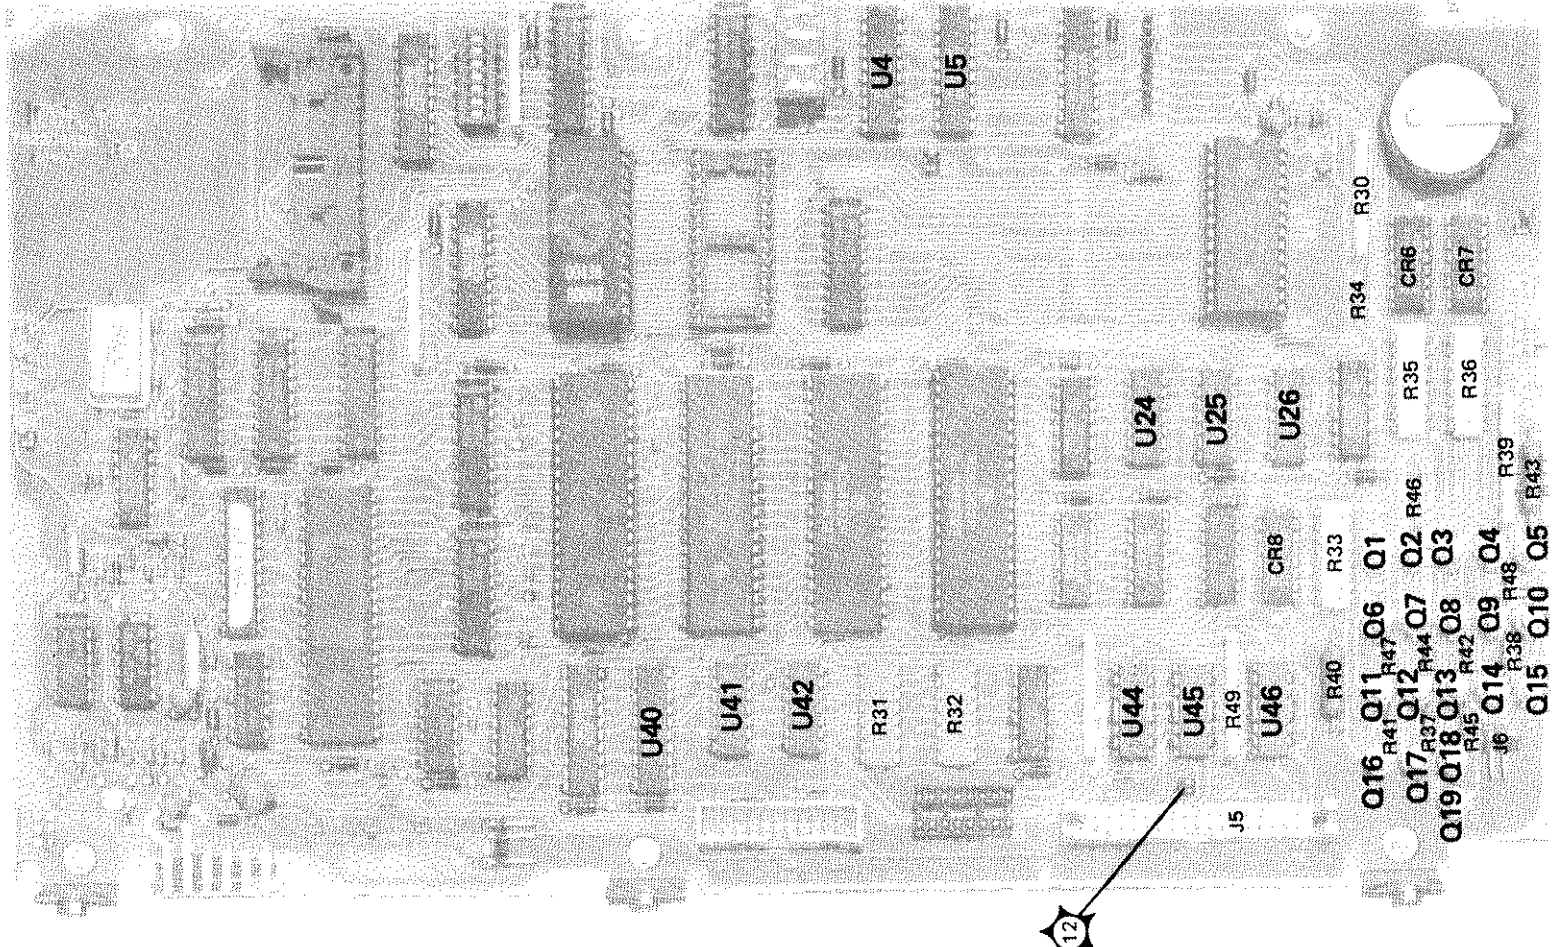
P/O Central Processing Unit Assembly Component Locations
